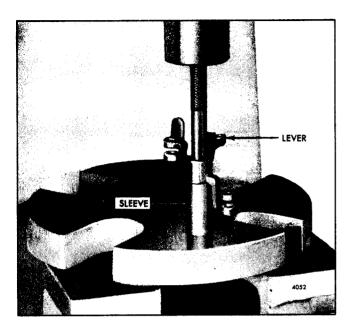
Removing or Installing Control Link Lever Bearings using Tool J 8985
